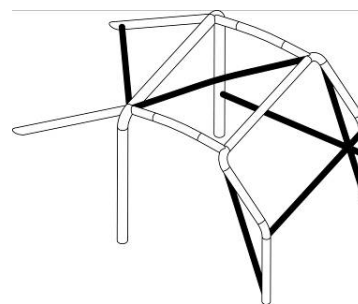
One diagonal member compulsory (according to Drawing 253-4 or 253-5).
